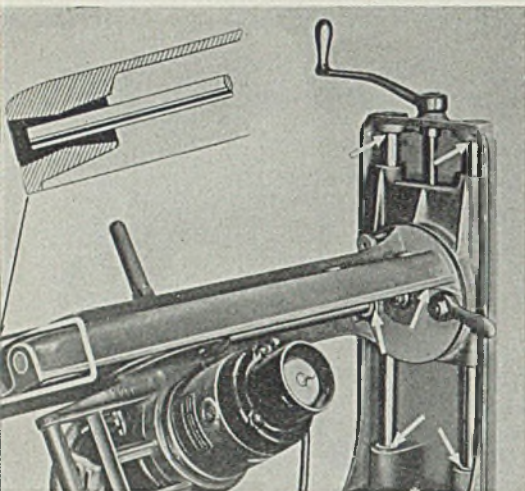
Expanding metal is employed at points indicated by arrows, to anchor finished steel rod "ways" of this machine in cored holes, as shown by inset left, above. Photo courtesy Cerro de Pasco Copper Co.
